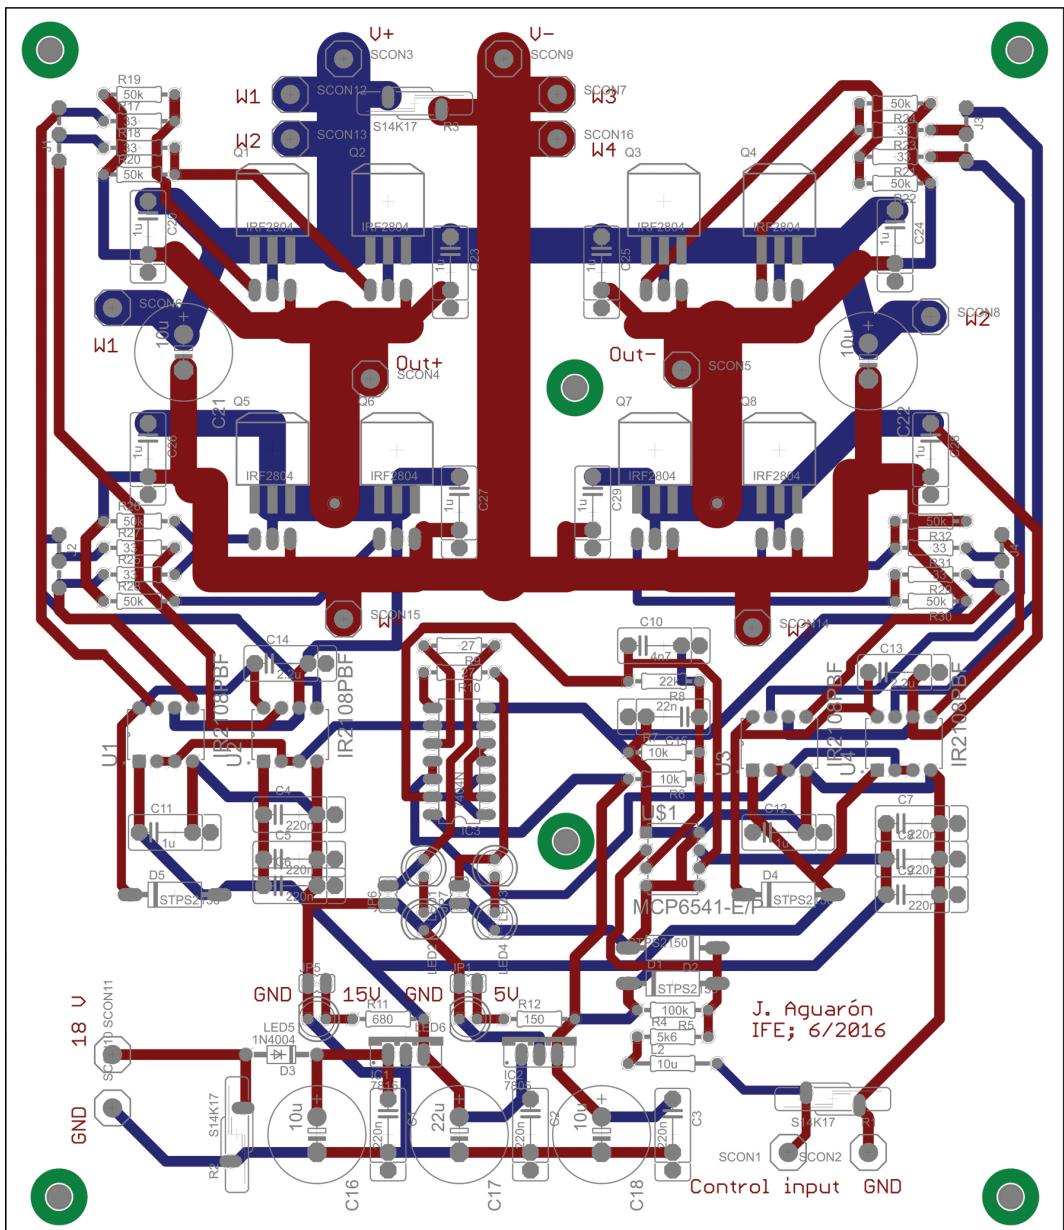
Layout of the PCB, as sent for manufacturing. Red traces: top layer. Blue traces: bottom layer.
